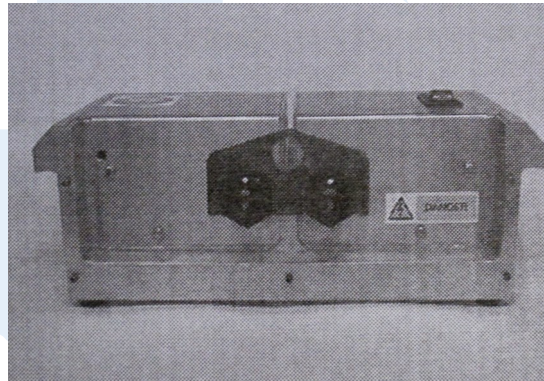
Showing double spanner positioned on output shafts (without wheels)
